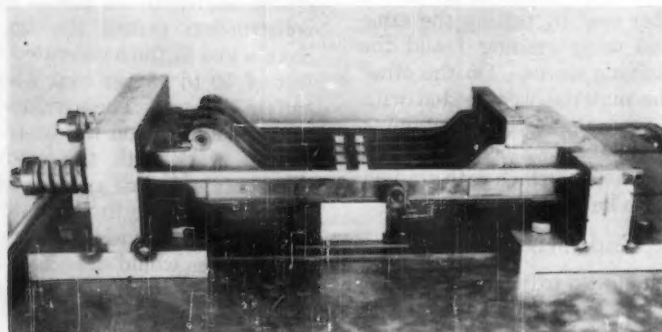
Fatigue tests of universal joint knuckles. (Reversing loads were applied through needle-bearing shackles to a shaft free to rotate with minimum play in the two bearings at the left. The connecting shaft was bolted to the fixture at the right. The amplitude limiting device in front operates automatically when contact is made with the vertical shackles that apply the reciprocating load. The test evaluated material and design changes which produced savings in machining and material.)
